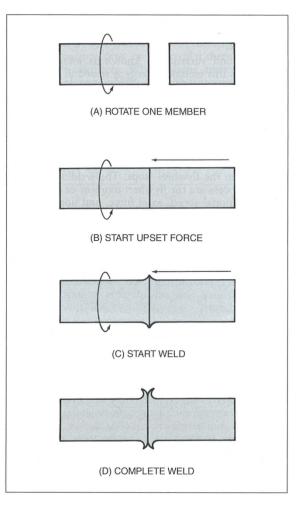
Schematic Illustration of Friction Welding Source: AWS Handbook 9th ed. Vol. 1
